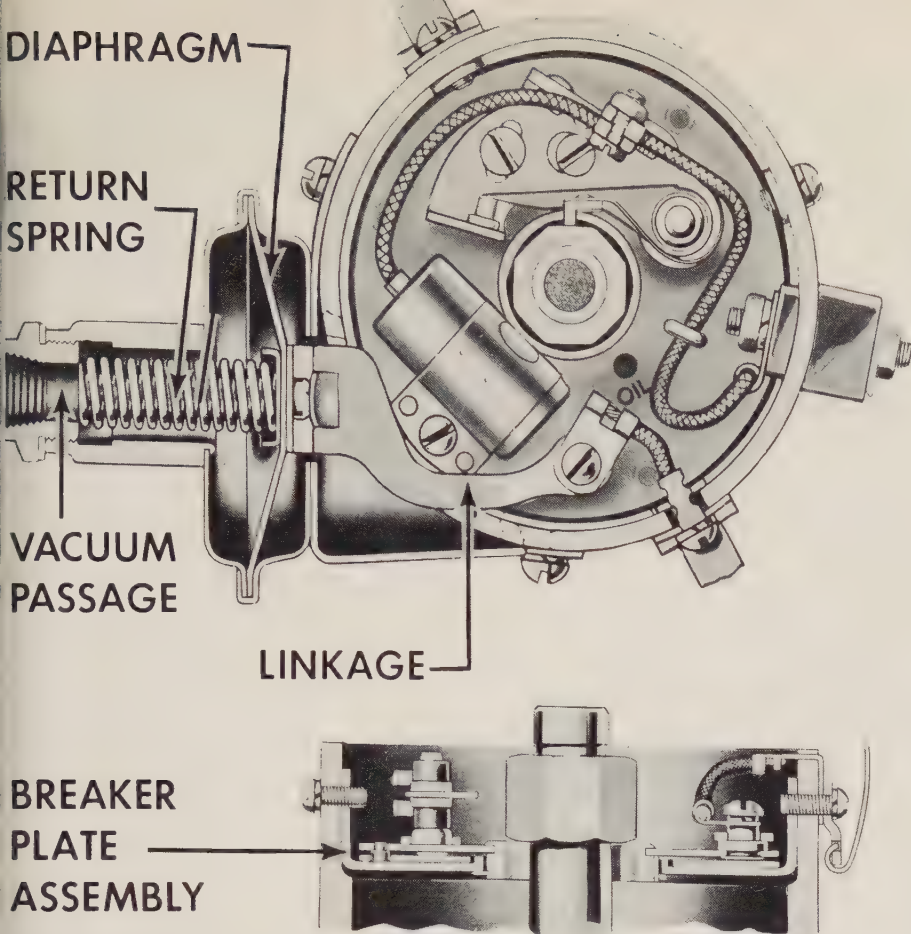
The vacuum advance mechanism contains an air-tight diaphragm which is linked on one side to the breaker-plate assembly and on the other side to a return spring fitted inside a vacuum passage leading to the carburetor. Under part-throttle conditions the high manifold vacuum acting on the diaphragm overcomes the return spring tension, which causes the breaker-plate assembly to rotate in a clockwise direction. Since the centrifugal advance mechanism rotates the breaker cam in a counter-clockwise direction, the total advance is the sum of the 2 separate advances.
